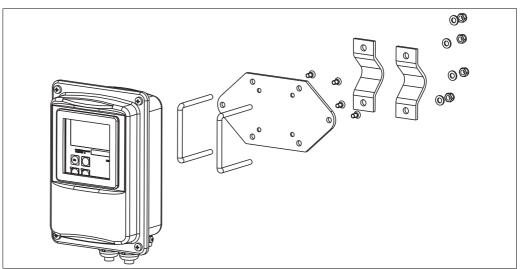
Mounting kit for installing the CLD134 separate version on posts
